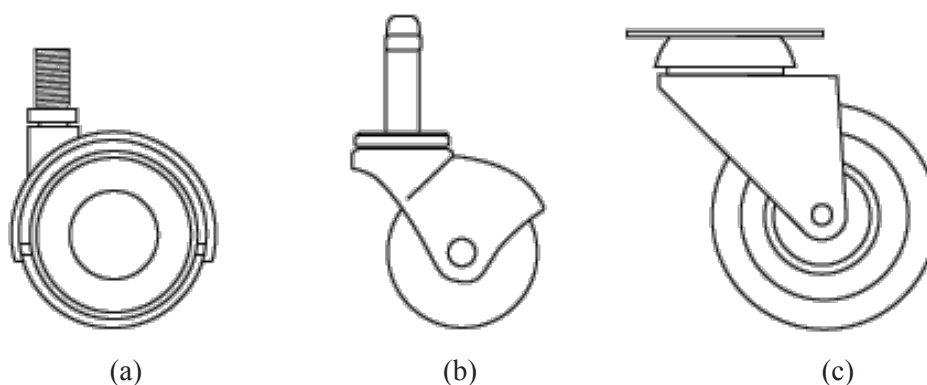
Types of castor wheel: (a) dual-wheeled (Type 1); (b) round-ball (Type 2); and (c) fork-wheeled (Type 3)
